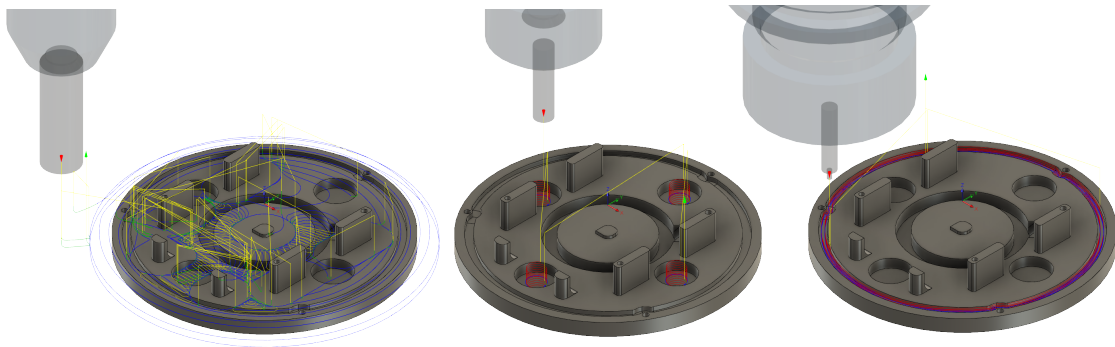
CNC tool paths created with AUTODESK Fusion 360 to fabricate WASP Version B on an EMCO E350 CNC mill.
